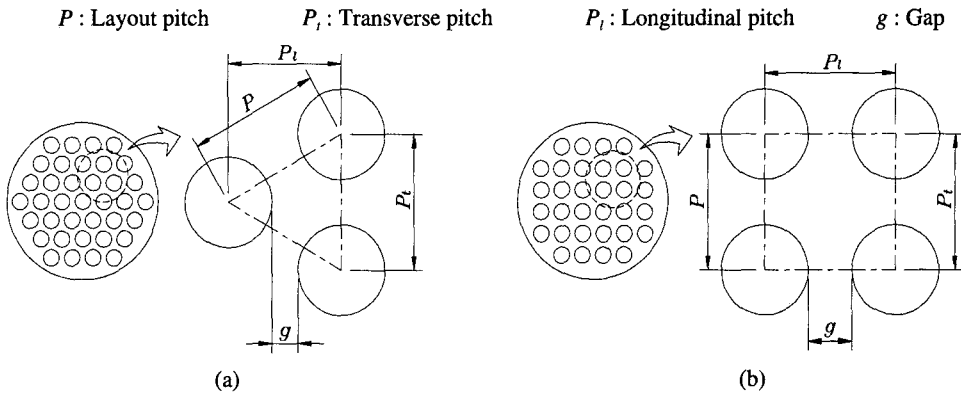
Tube layout scheme (a) triangular tube layout (b) square tube layout.
